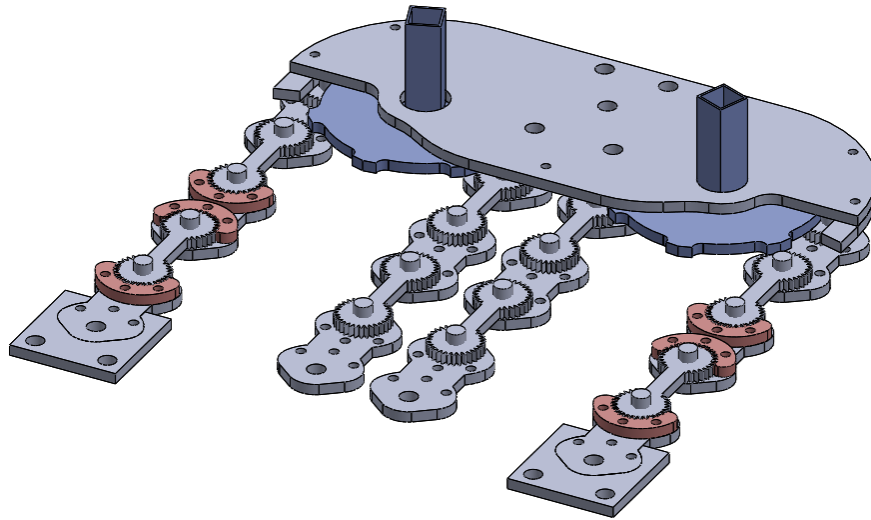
Trimetric view of prototype I, color-coded by red and blue, representing locking plates and drive system respectively.
